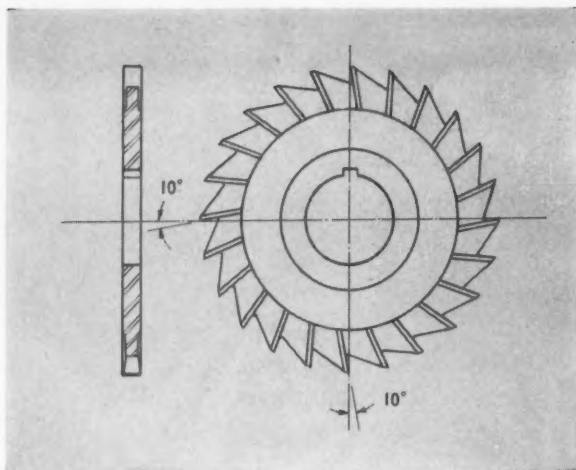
Drawing showing type of milling saw best designed for machining magnetic ingot iron.
